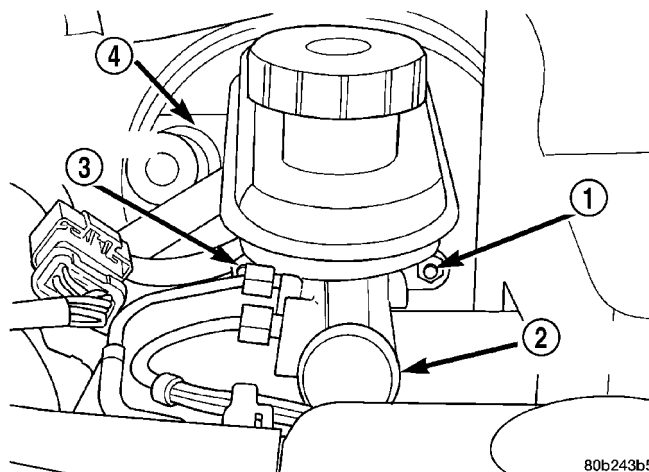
Master Cylinder To Vacuum Booster Mounting
